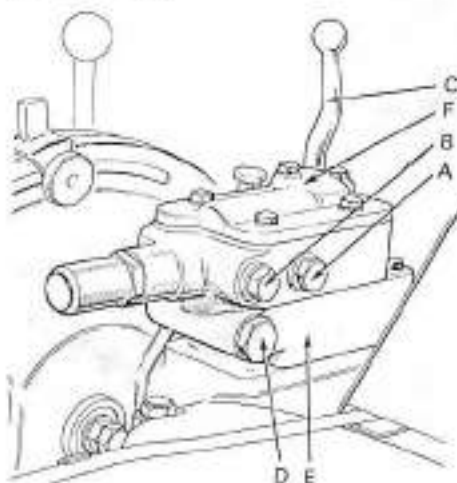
On 1210, 1212, 1410 and 1412 models, where special test plate which is installed in place of control valve cover (F) is not available, check pressure by connecting test gage to remote port (A or B) and pressurizing that port. Control lever must be held to keep it from returning to neutral when detent release pressure is reached. Plug (D) in adapter plate (E) seals external hydraulic return port.
